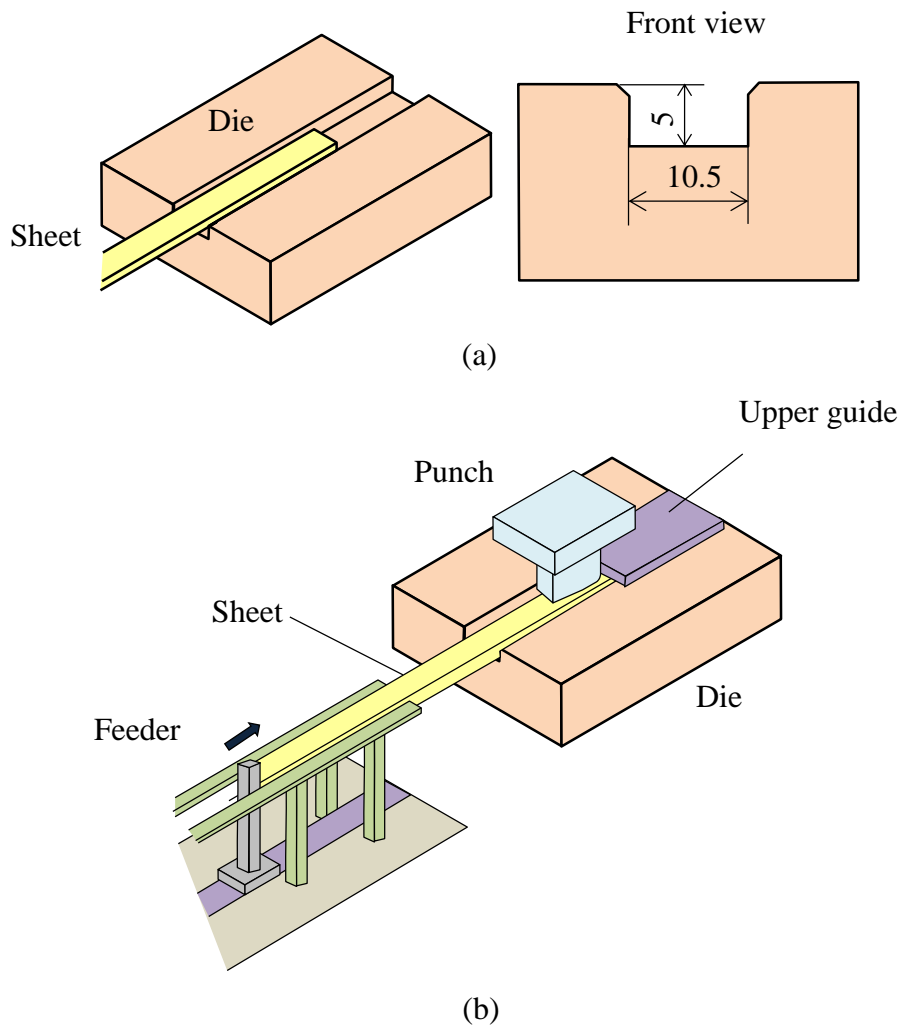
(a) Grooved die for preventing curvature of formed sheet and (b) experimental setup with grooved die.
